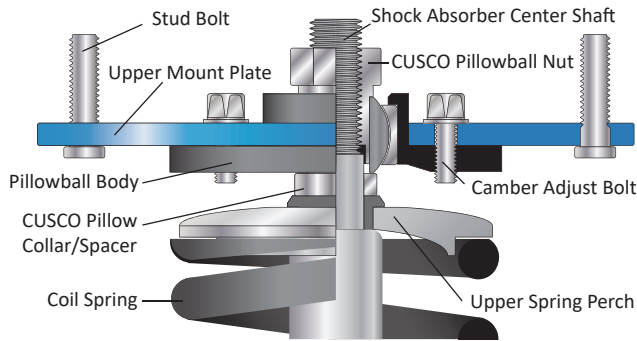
Image of Assembly of Strut-type CUSCO Upper Mount
